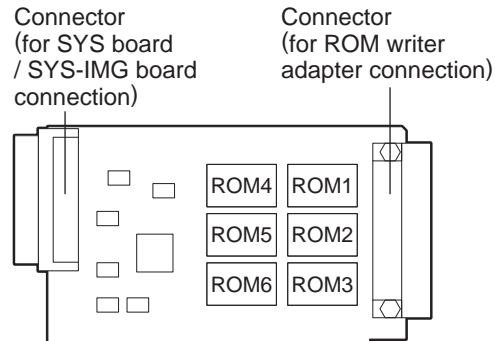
Jig board: PWA-DWNLD-350-JIG2 (48 MB)
